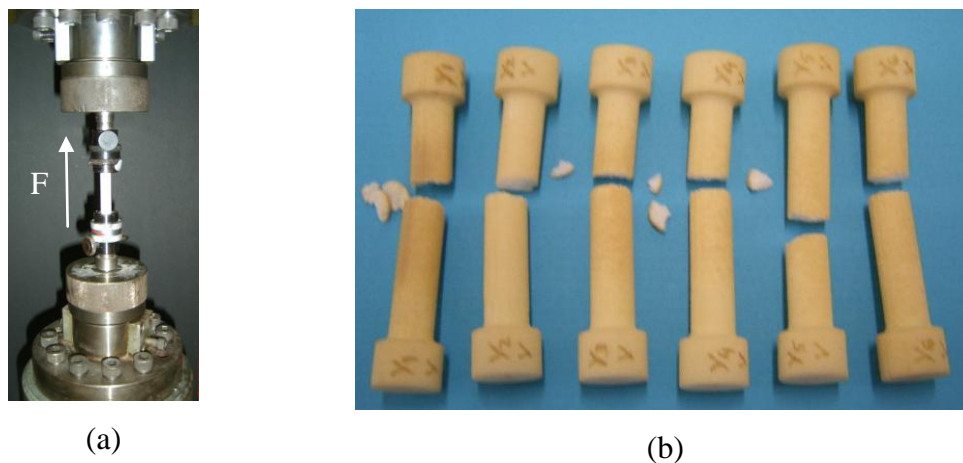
Tensile test specimens: (a) on testing machine, (b) after testing
